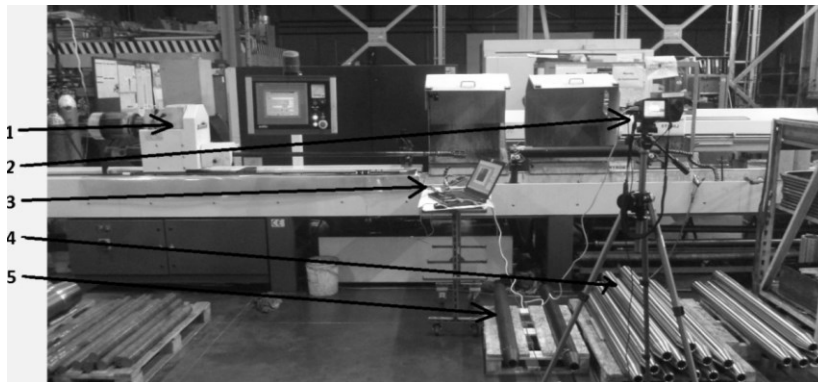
Research stand: 1 – Sunen HTH 4000S horizontal CNC honing machine from Sunnen, 2 - Vigocam V50 infrared camera, 3 - computer with THERM 2.23.2 software, 4 - unpainted workpieces, 5 - painted black machined workpiece
